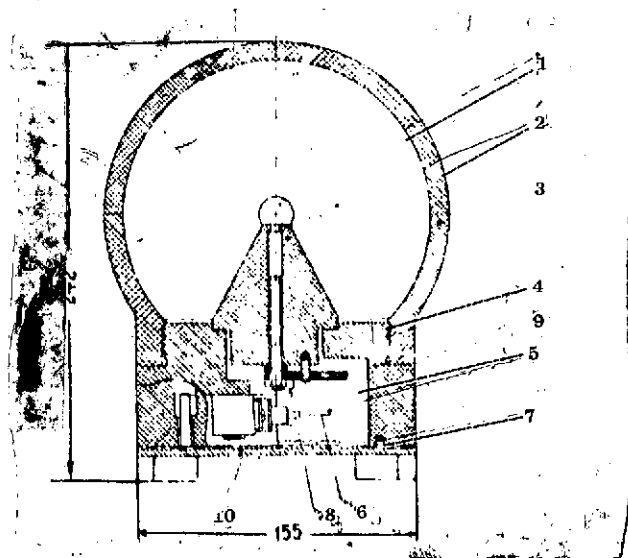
Ionization chamber of the IK-2P instrument. 1--selecting electrode; 2--amber insulator; 3--spherical housing of the chamber; 4--connection; 5--base; 6--gold plated contact; 7--covering; 8--wire; 9--output; 10--lid.
